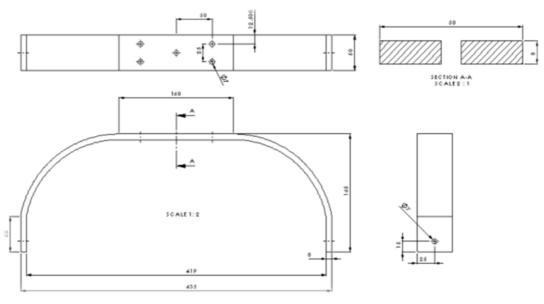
Main Landing Gear Structure Dimension of LSU-02-02
